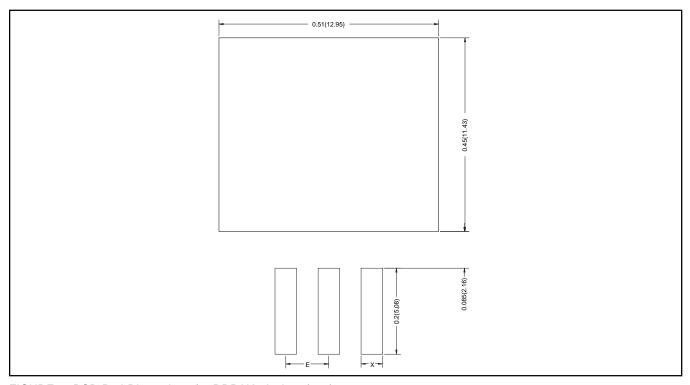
PCB Pad Dimensions for DDPAK-inches (mm).
